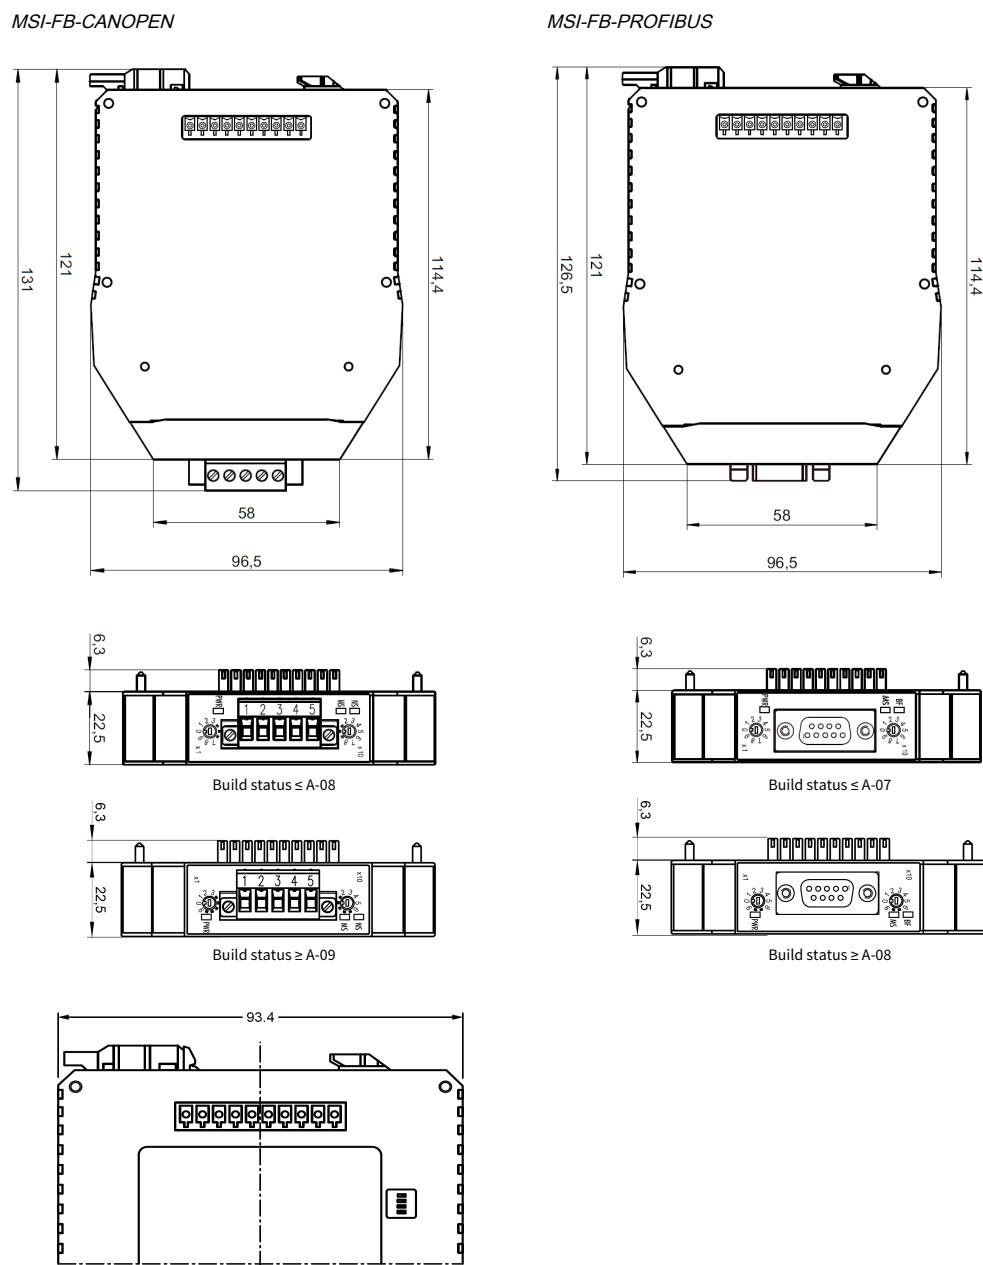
Dimensional drawing CANopen and PROFIBUS gateways (mm)
